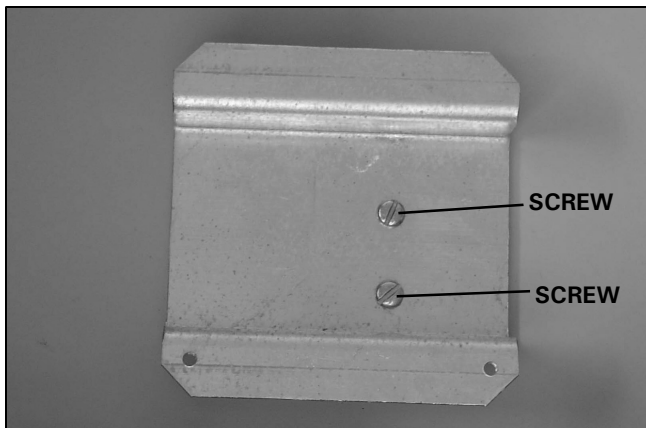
TVSS Mounting Bracket Secured to the Back of the Enclosure.
